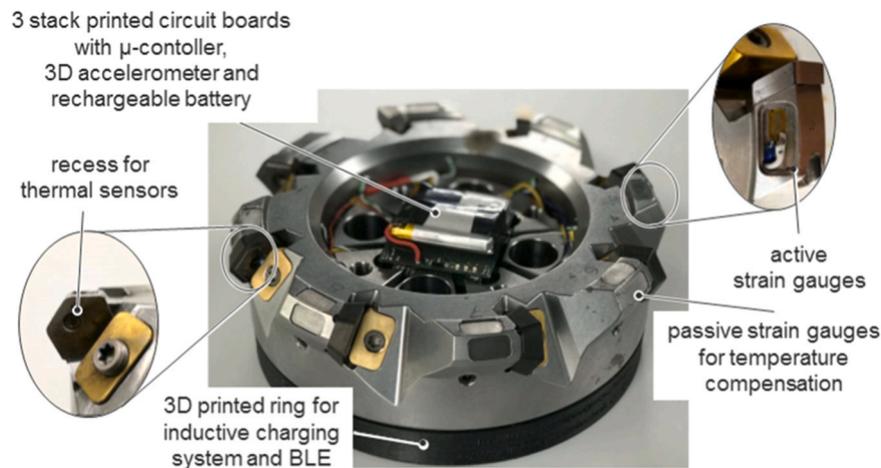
A prototype milling tool integrated six strain gauges, K-type thermocouples, an MEMS accelerometer and position sensor [123].
